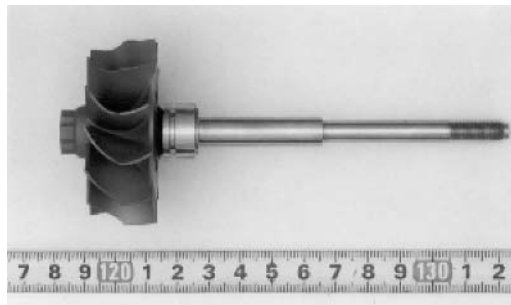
Photo of a cast γ alloy turbocharger rotor installed in the Mitsubishi Lancer GSR model (courtesy Mitsubishi Automobile Co., Ltd.)
